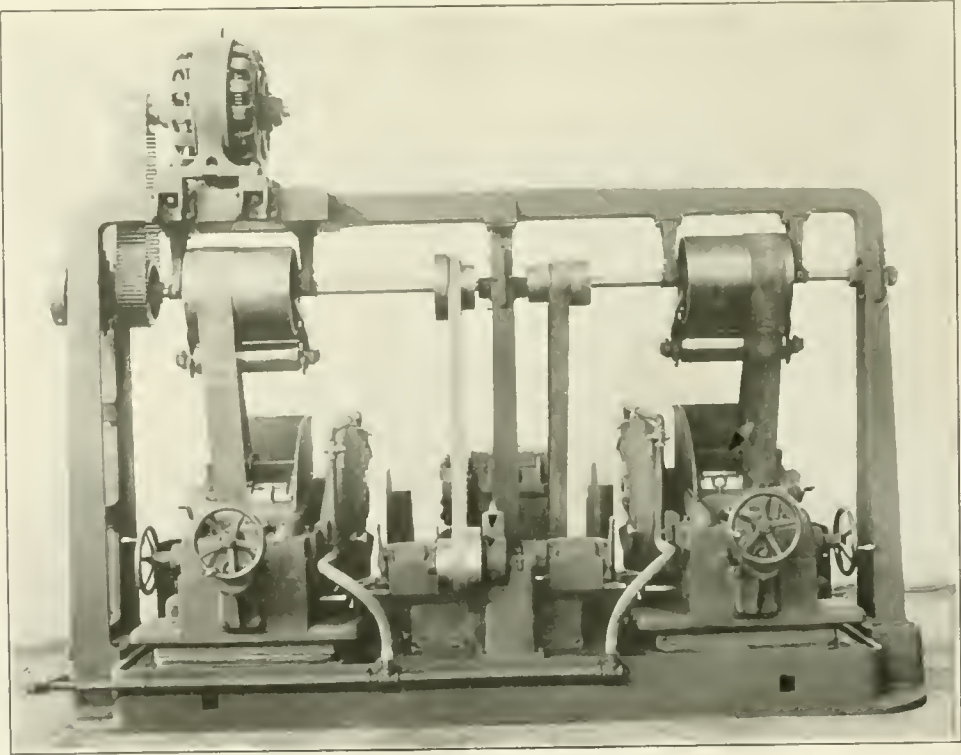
Machine Developed for Grinding Mounted Car Wheels
